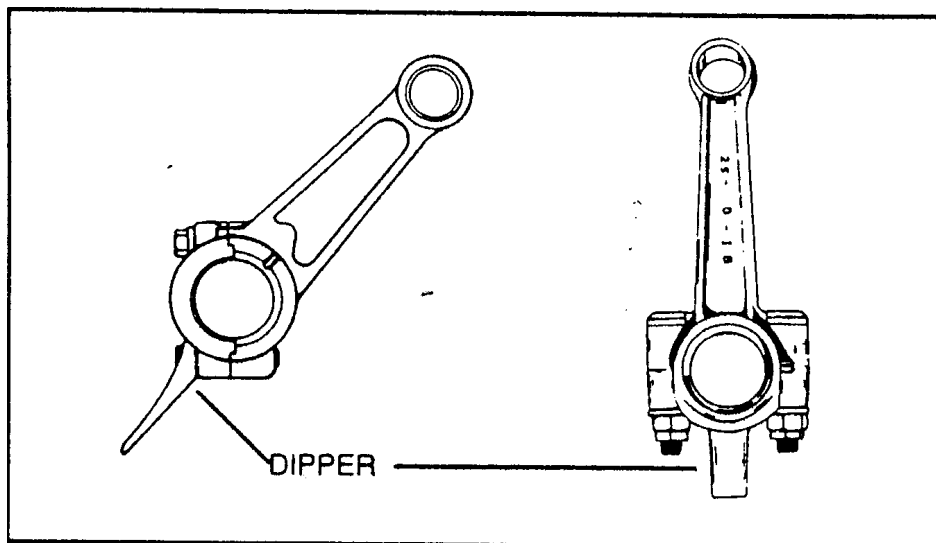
Dipper on Connecting Rod – used to lubricate most Small Horizontal Shaft Engines [8]
